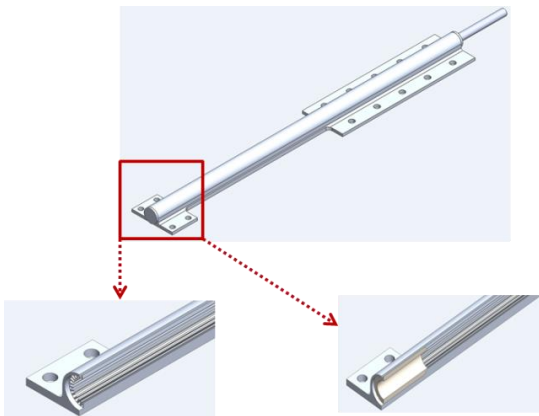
Top: Drawing for the external geometry for the axial grooved and the hybrid CCHP, Bottom left: axial grooved CCHP, Bottom right: hybrid sintered/grooved CCHP.
